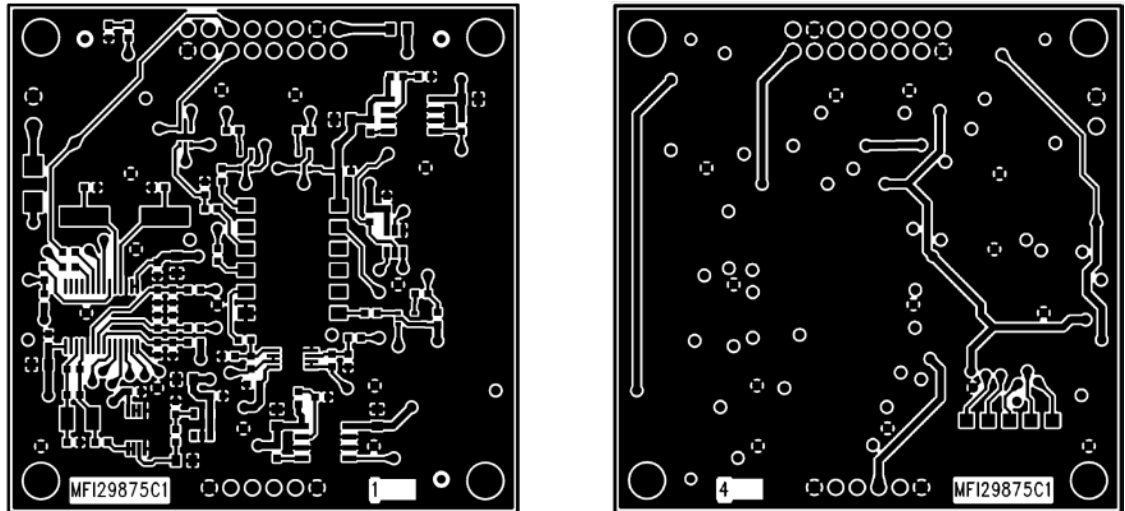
TOP (left) and BOTTOM (right) layout of SCA10xx PCB (aspect ratio not 1:1).
